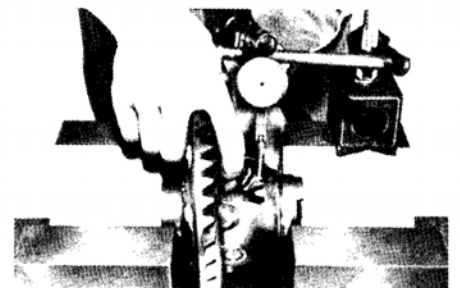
Check backlash between spider gear and side gear using a dial indicator as shown. Refer to text.
